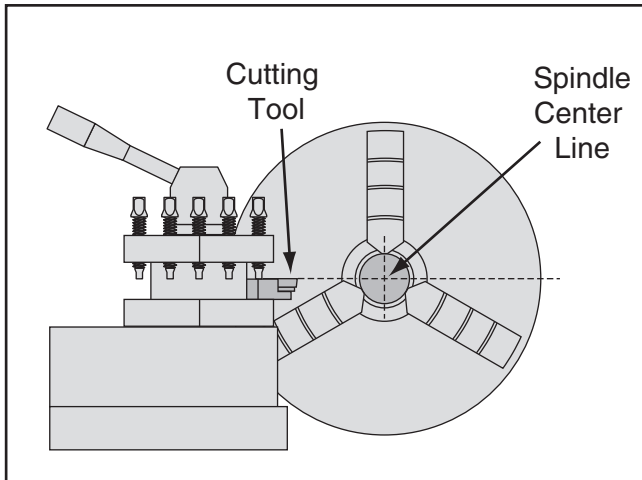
Cutting tool aligned with spindle centerline (viewed from tailstock).
